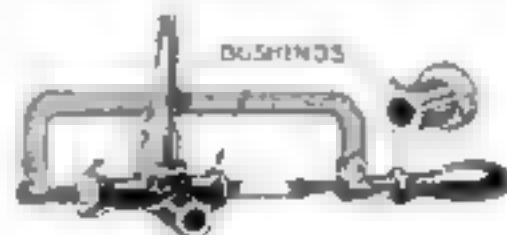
Above: Saw through side wall of your spindle body bushings and they can be driven out easily
